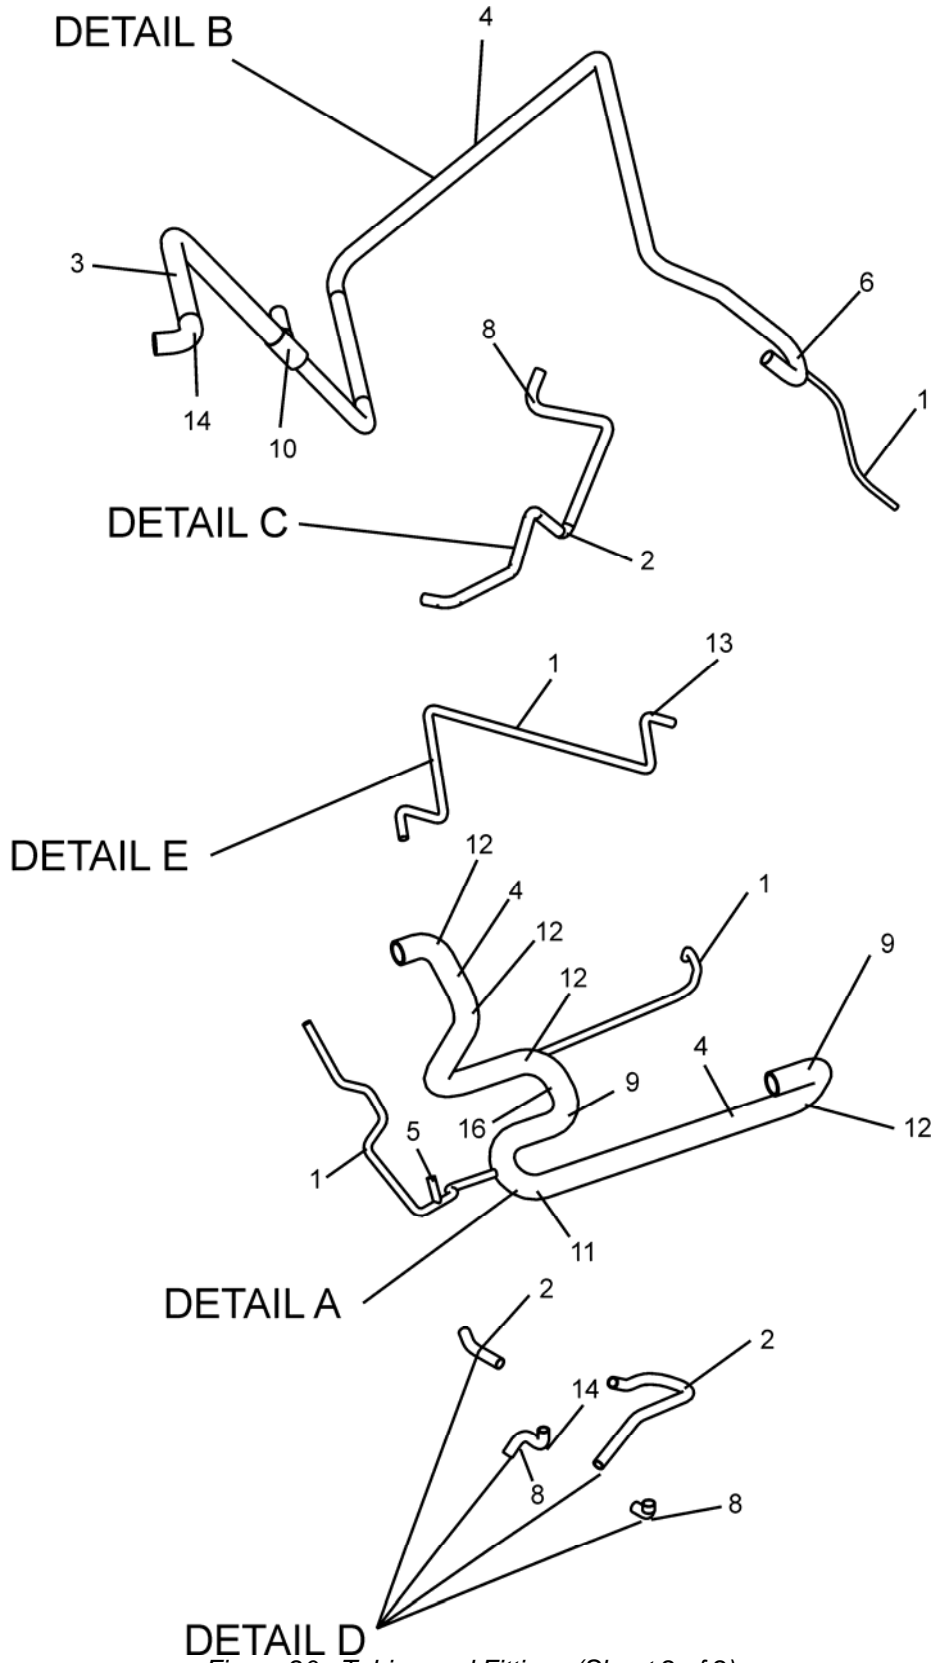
Tubing and Fittings (Sheet 2 of 2)
